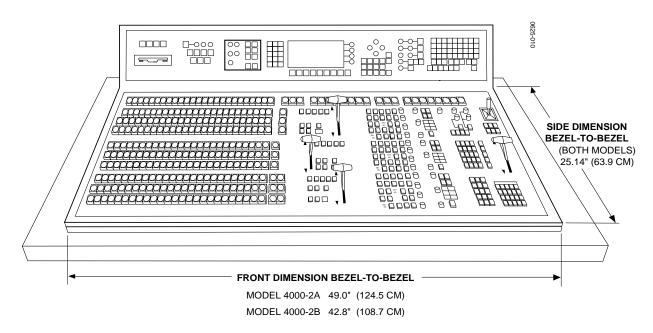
Model 4000-2 Closed Lid Bezel-to-Bezel Dimension Detail
